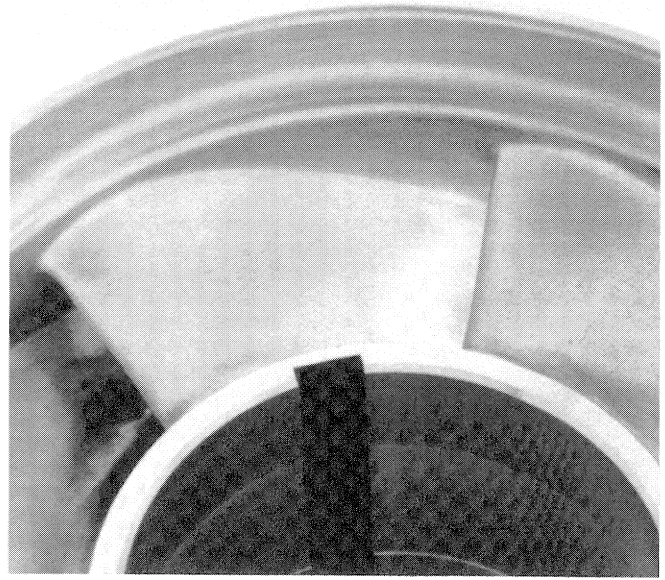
Impeller after Electric-Discharge Machining and Smoothing of Transition Zones.
